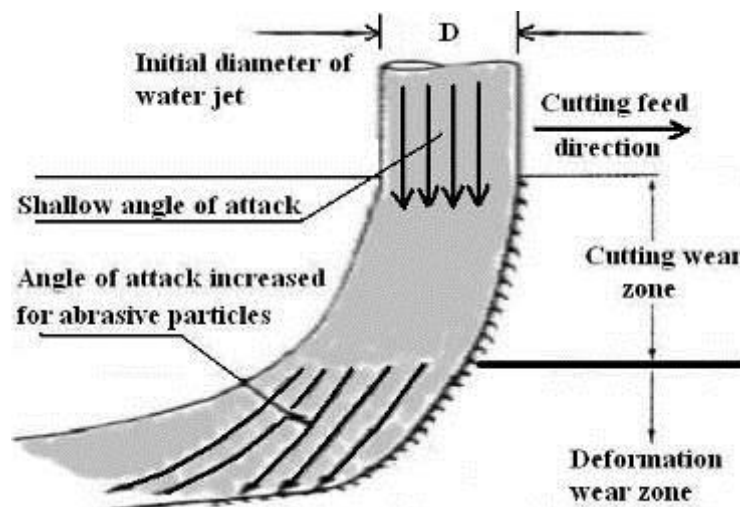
Cutting and deformation wear zones in AWJ cutting [69].
